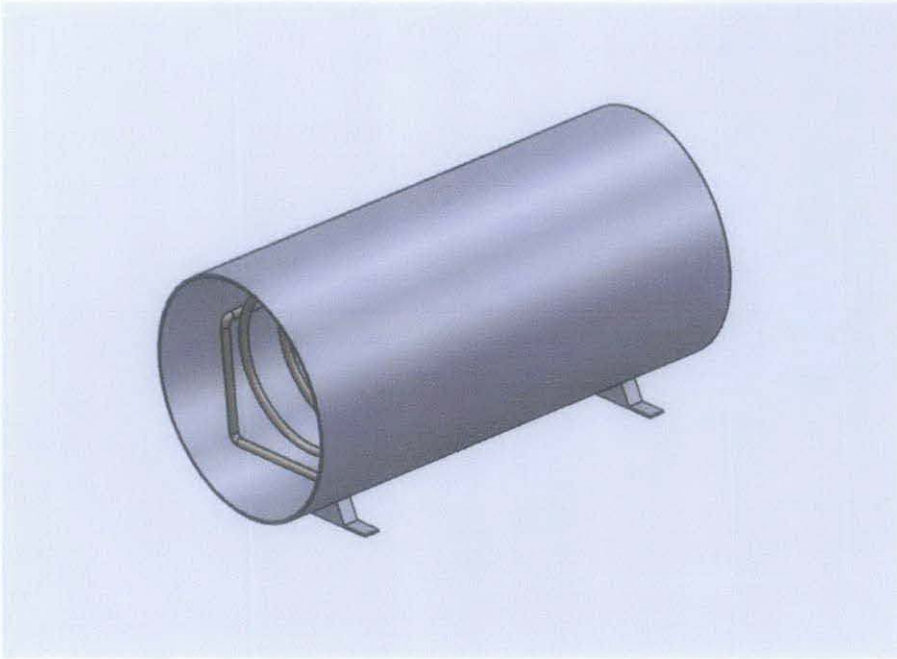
Shell and tube heat exchanger with the 1inch- 20 mm tube reducer
